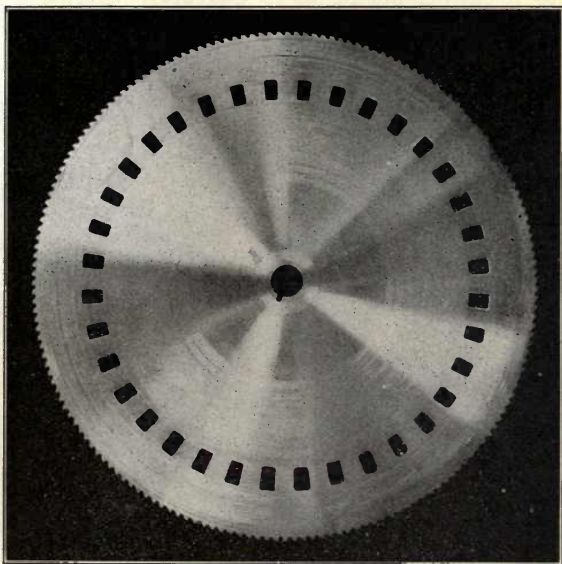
Metal cutting or cold saw used for cutting large steel sections.
